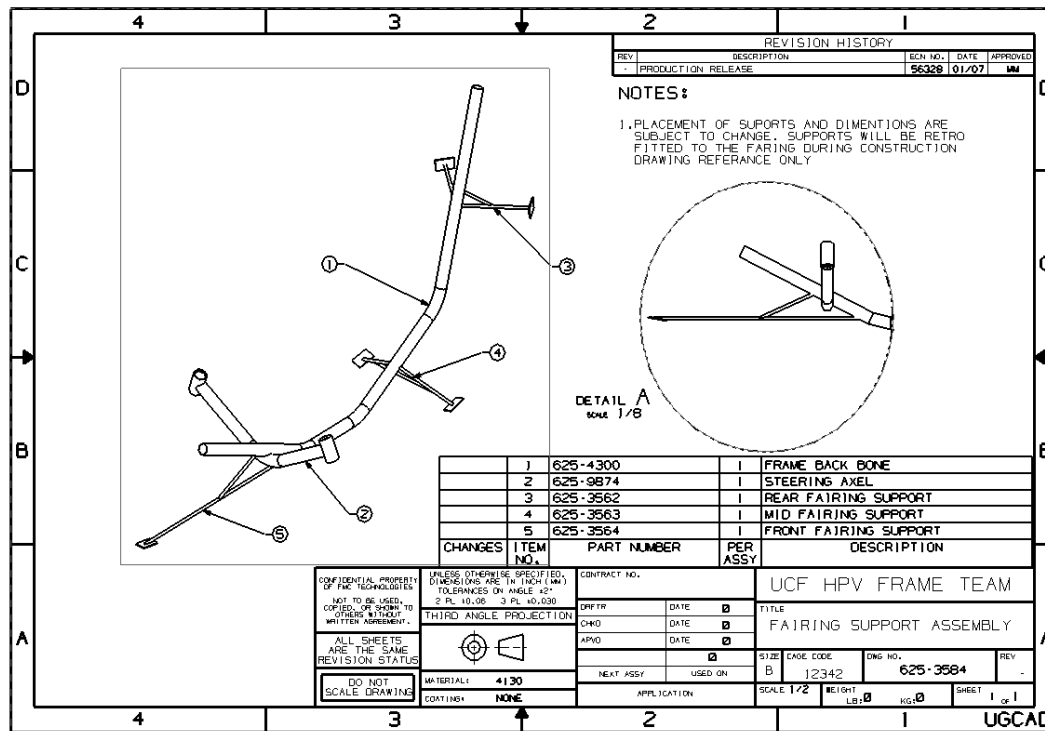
Detailed Drawing of Fairing Supports Assembly.
